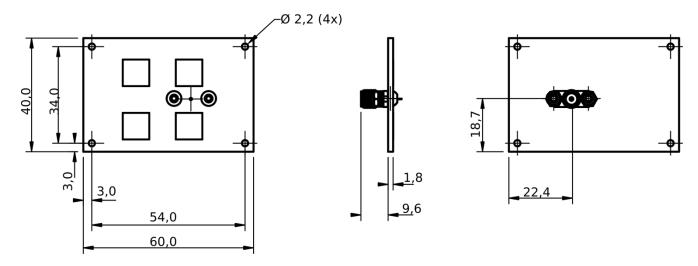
Mechanical dimensions and positions of RF connectors. All tolerances for all mechanical dimensions are  $\pm$  0.1mm, for connector  $\pm$  0.5mm and high (z-dimension)  $\pm$ 10%. These are based on manufacturing tolerances by the PCB manufacturer.
